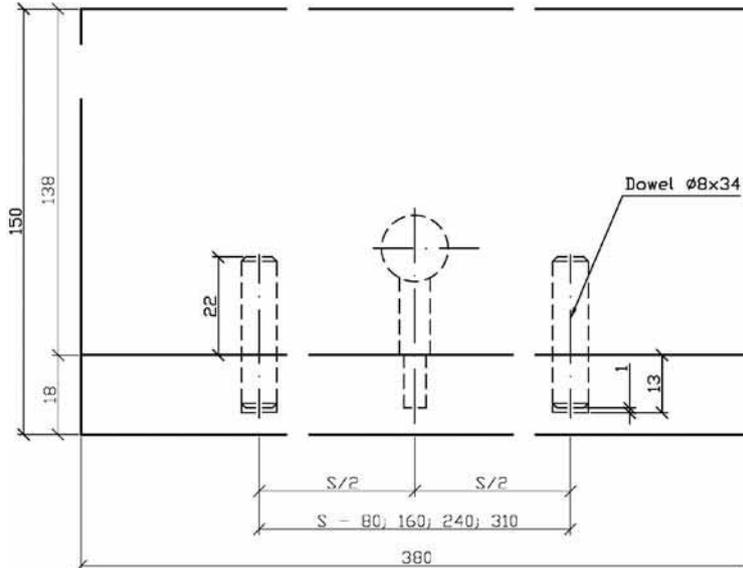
Specimen construction and dowel spacing. S – dowel spacing [mm]
